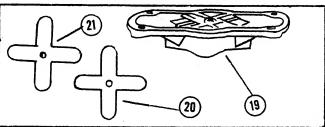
REED PLATE ASSEMBLY (Reference numbers shown on Legend, Figure 30.)
